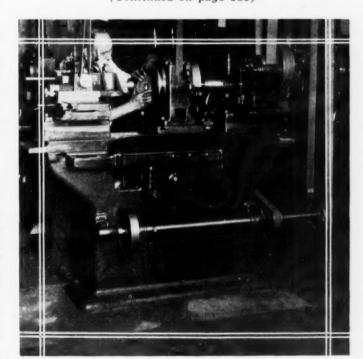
Internal and spline grinding of transmission gear in Packard plant on converted Heald grinder
